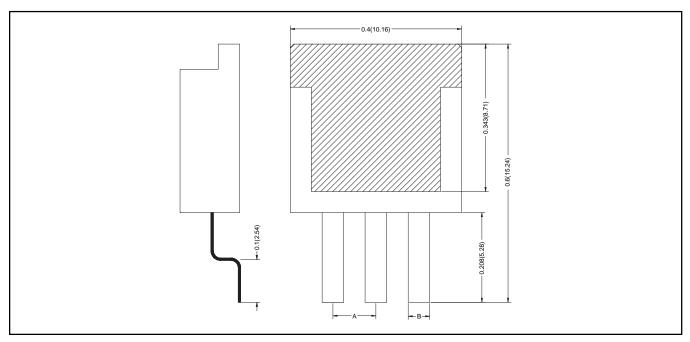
DDPAK Package Dimensions—Inches (mm).
